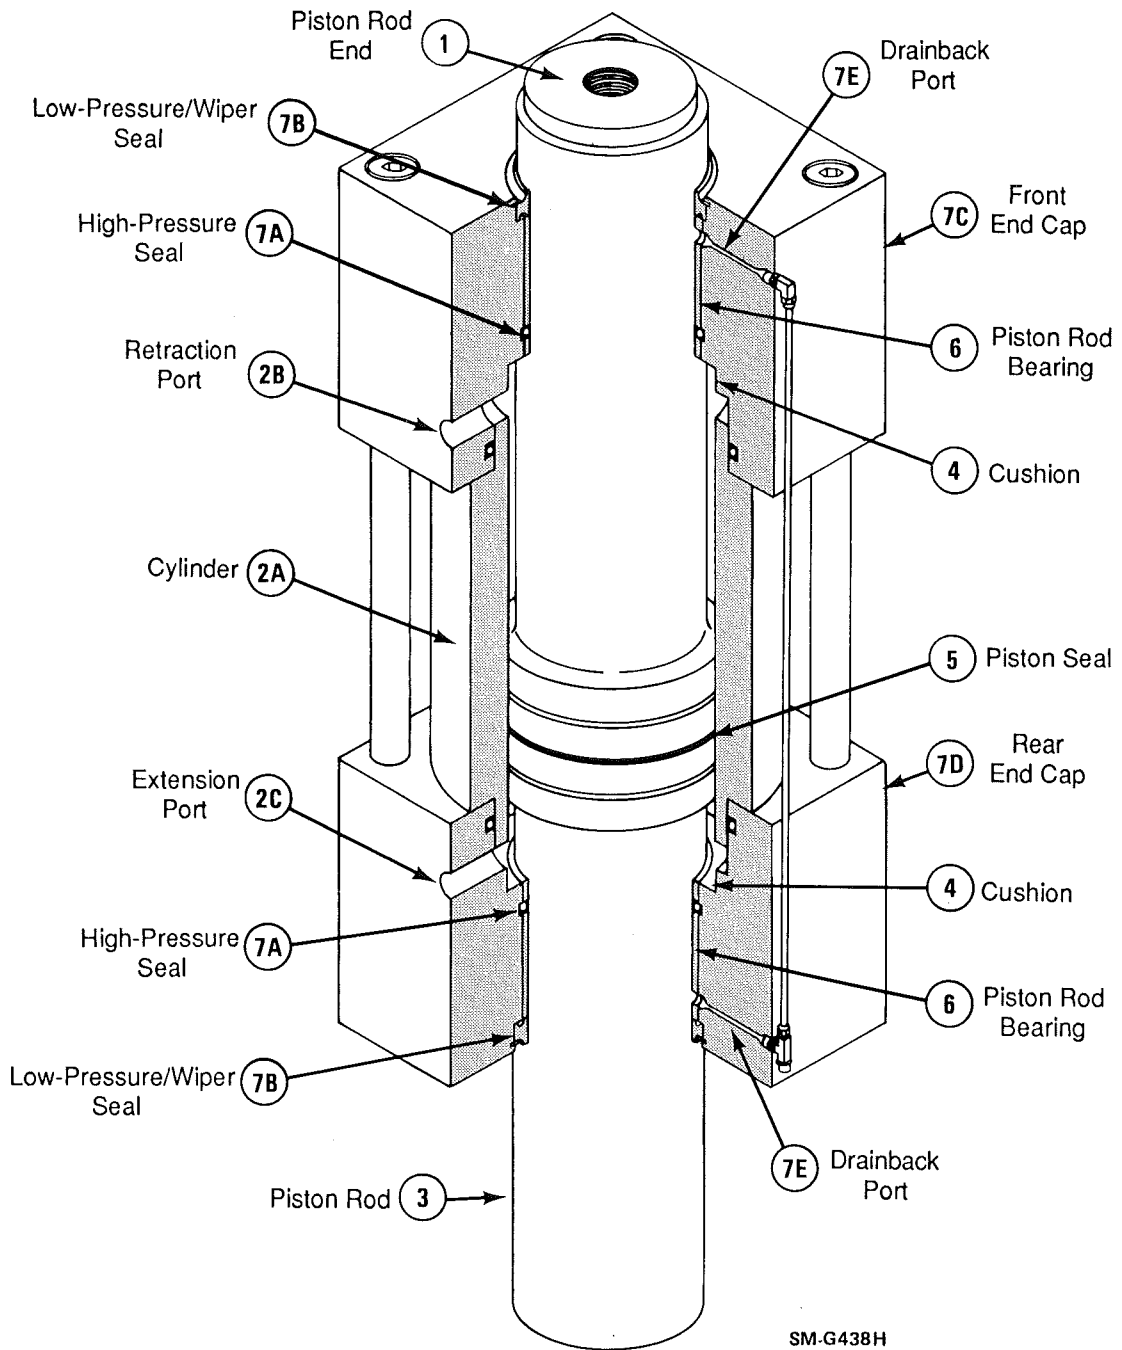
Cutaway View of a Typical Series 244 Hydraulic Actuator
